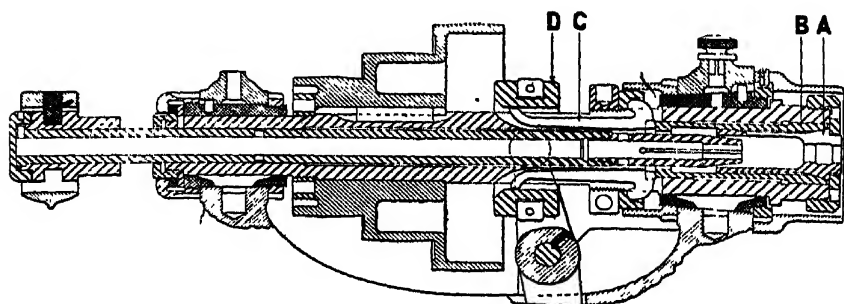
A MORE EXPENSIVE FORM OF CHUCK
